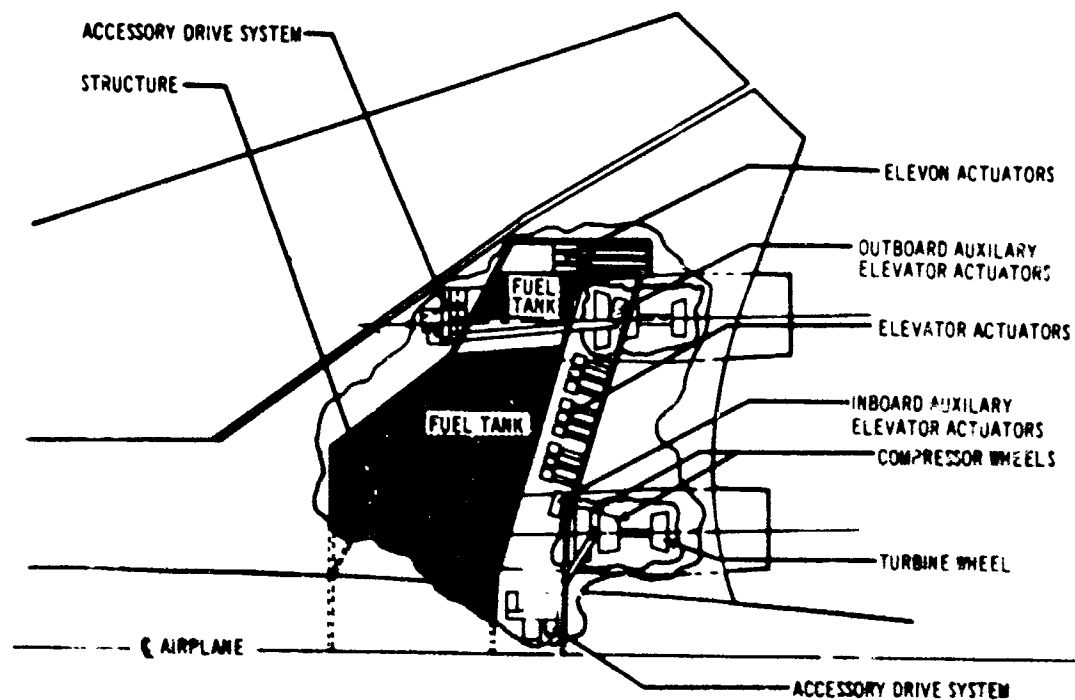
Pod/Horizontal Tail Arrangement (P&WA)
